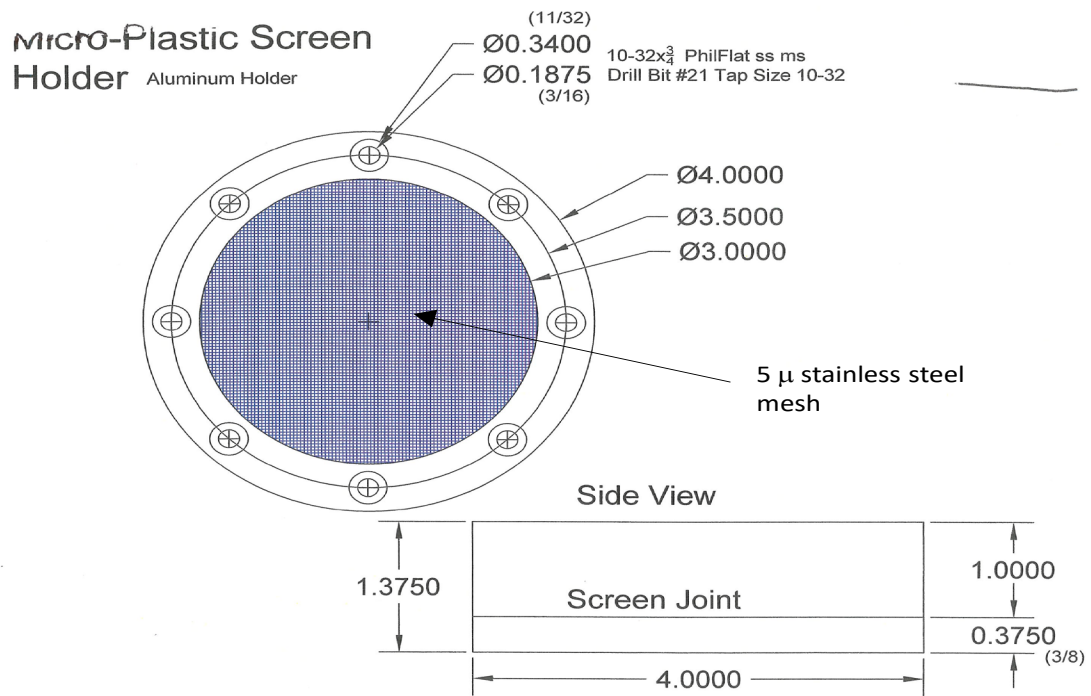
Technical drawing for fabricated microplastic 5µm sieve.
